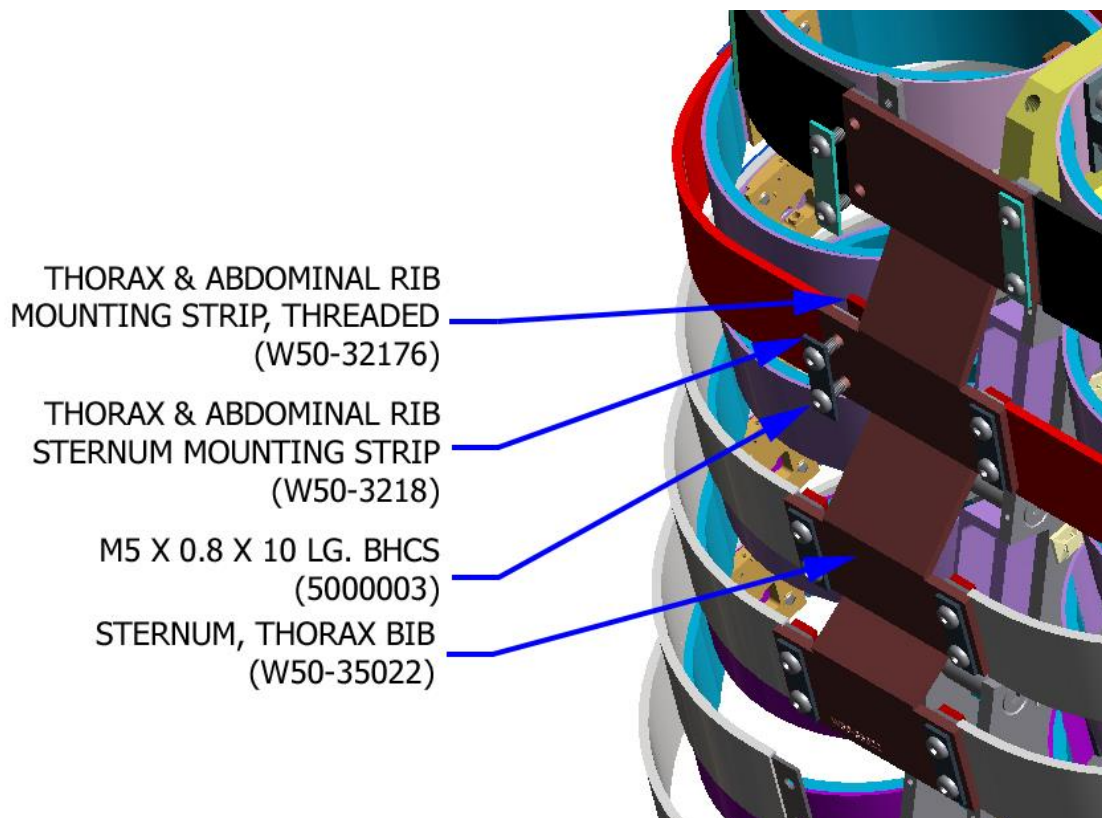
Detailed view of attaching the thorax and abdominal mounting strips.
